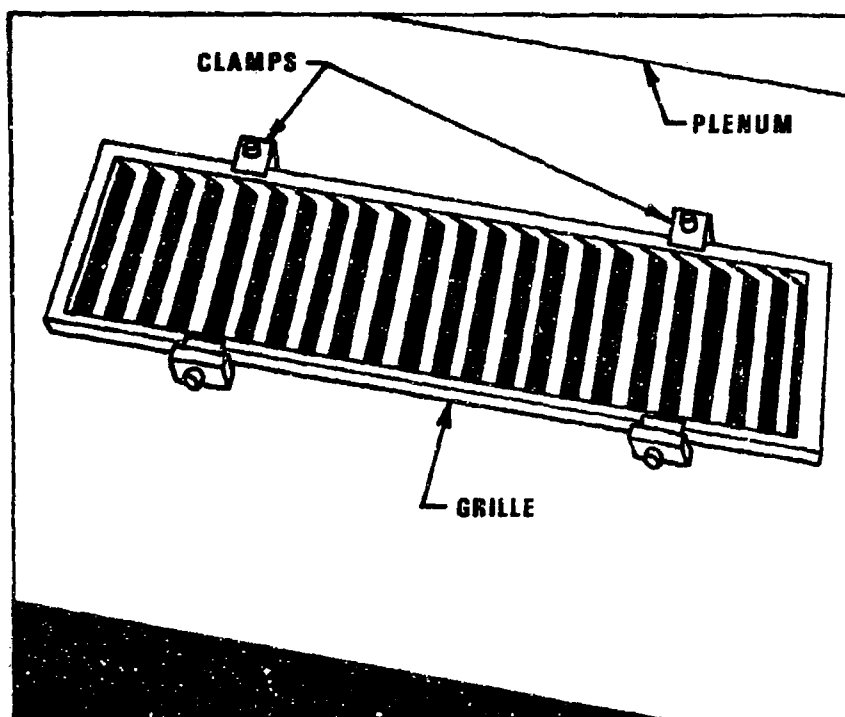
Grille Assembly Ready for Test on Flow Chamber
